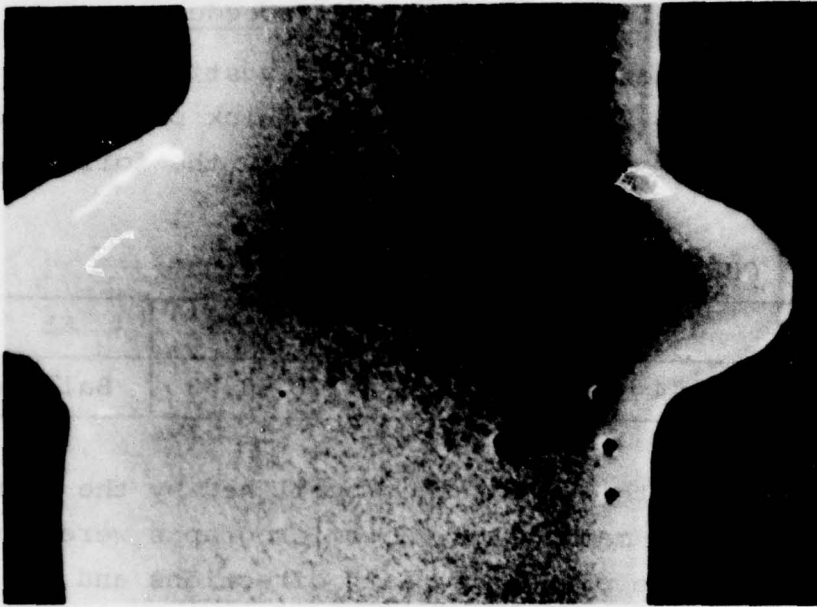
Photomicrograph of Pressure Weld From MAU-78/B Assembly, Spec #11 (40X).
